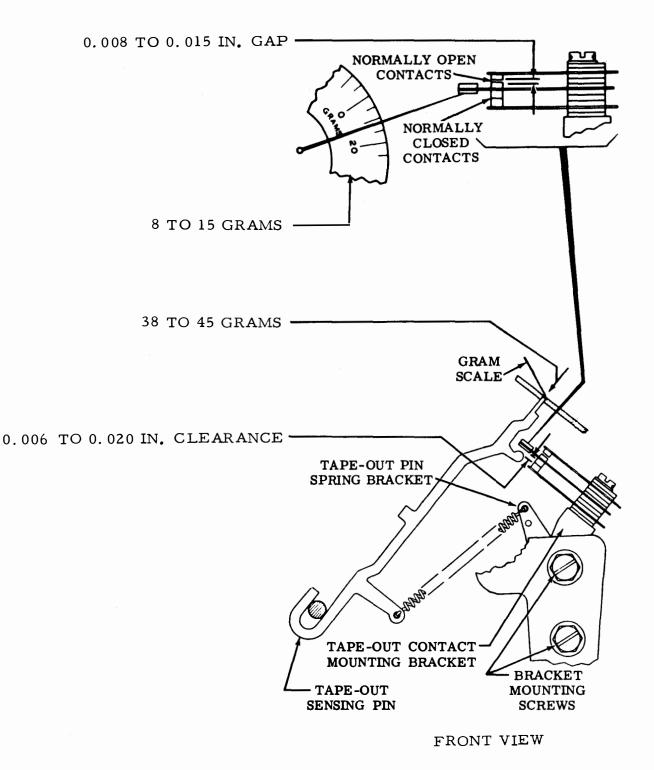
Tape-Out Contact Assembly, Tape-Out Sensing Pin Spring, and Tape-Out Contact Bracket
